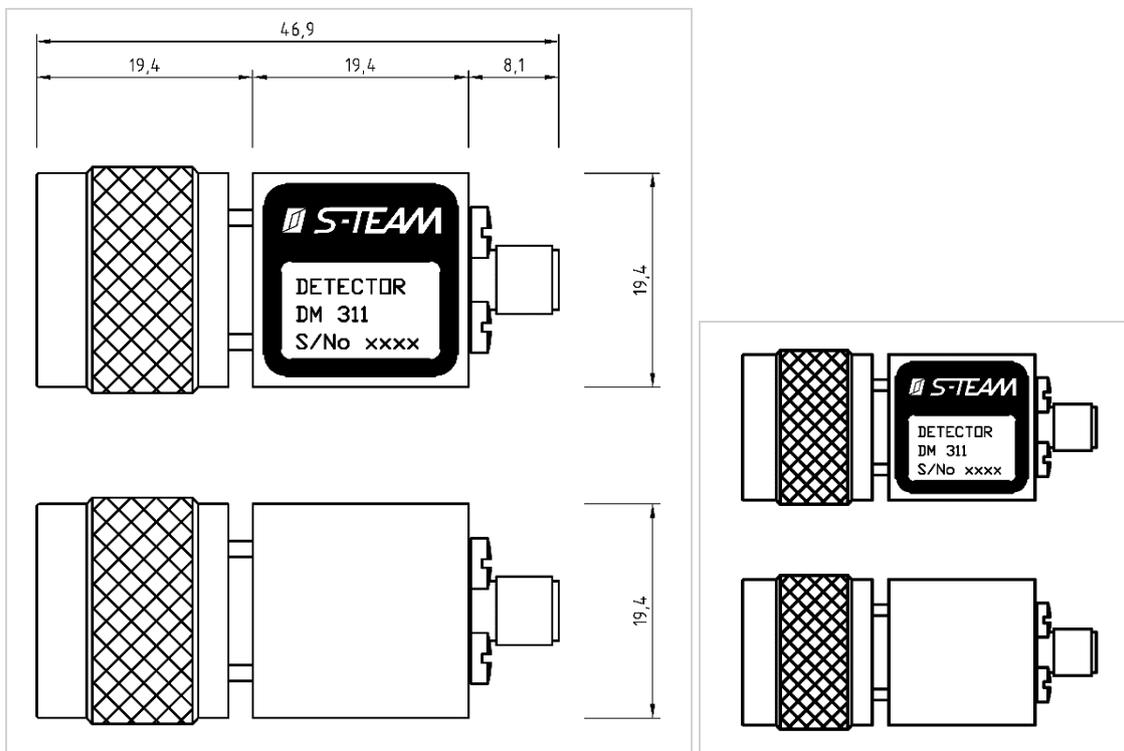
Basic DM311 dimensions in millimeters. Right: Actual size.
